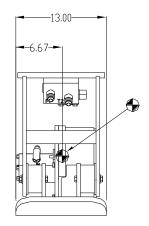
Model 500B shown with Flat Top Mounting Frame (Mounting holes accept IN1 & IN2 / XR Mounting Brackets) Center of Gravity
